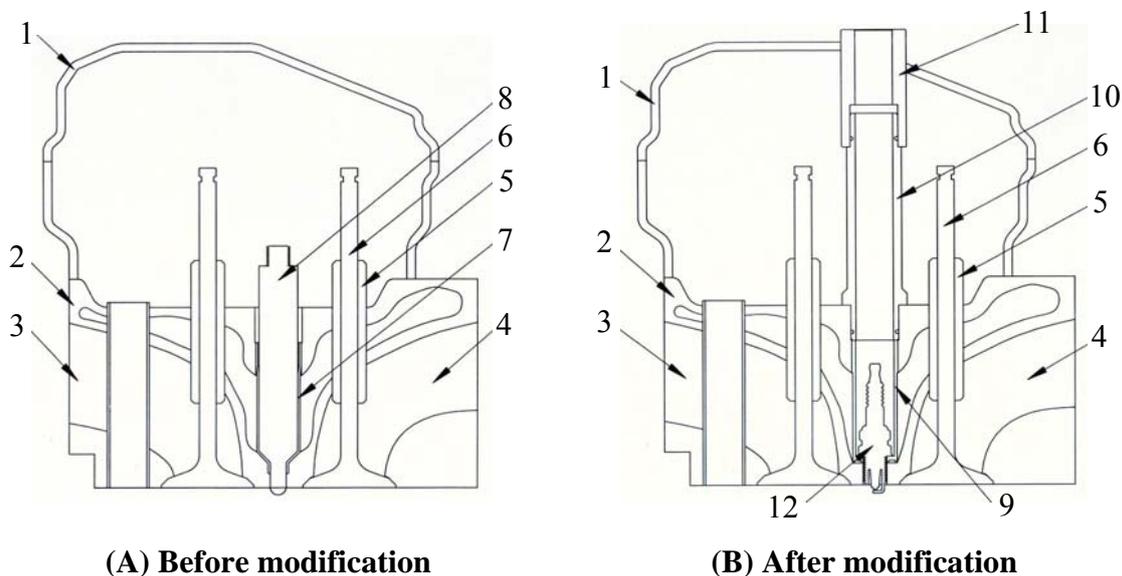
Cutaway view of the modified cylinder head: (1) Valve cover, (2) Cylinder head, (3) Intake port, (4) Exhaust port, (5) Valve guide, (6) Exhaust valve, (7) Diesel injection nozzle guide, (8) Diesel injection nozzle, (9) Spark plug guide, (10) Middle spark plug rod guide, (11) Upper spark plug rod guide, and (12) Spark plug
